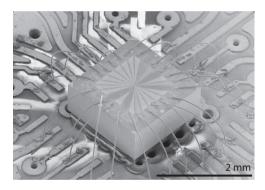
A 2 mm \times 2 mm sample glued on a printed circuit board. Wire bonds connect the bond pads on the sample to the lines on the PCB.
